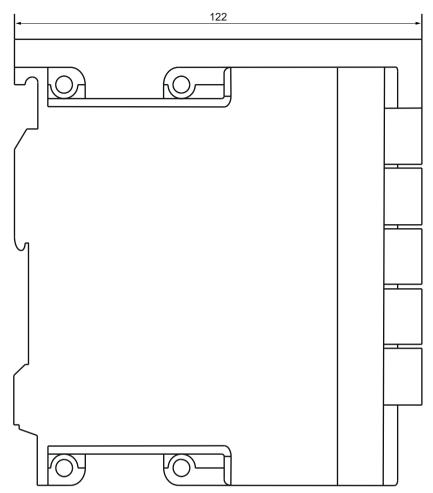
Dimension drawing, side view of SCALANCE X-000
